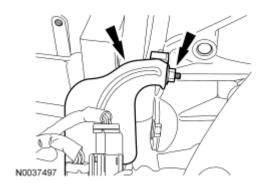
Locating Engine Wiring Harness Bracket And Nut Courtesy of FORD MOTOR CO.
